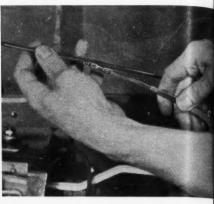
(Below) Checking Starter Pinion Compression Spring Pressure. Fig. 5. (Right) Starter Vacuum Switch
